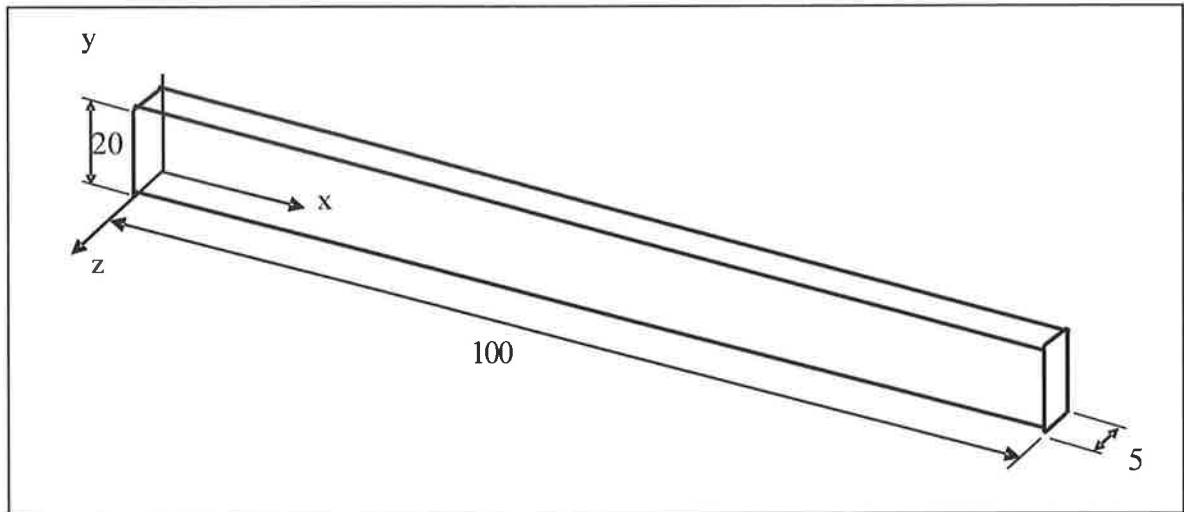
, Rectangular specimens configuration dimensions (in mm) [141]
